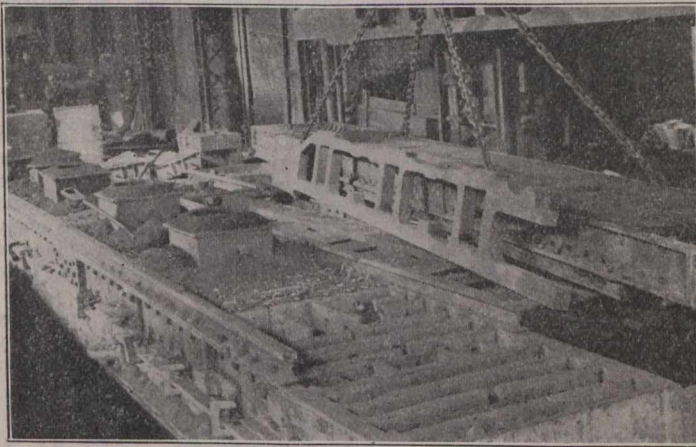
Cope and Flask with Drawn Pattern, and Mould ready to Pour.
